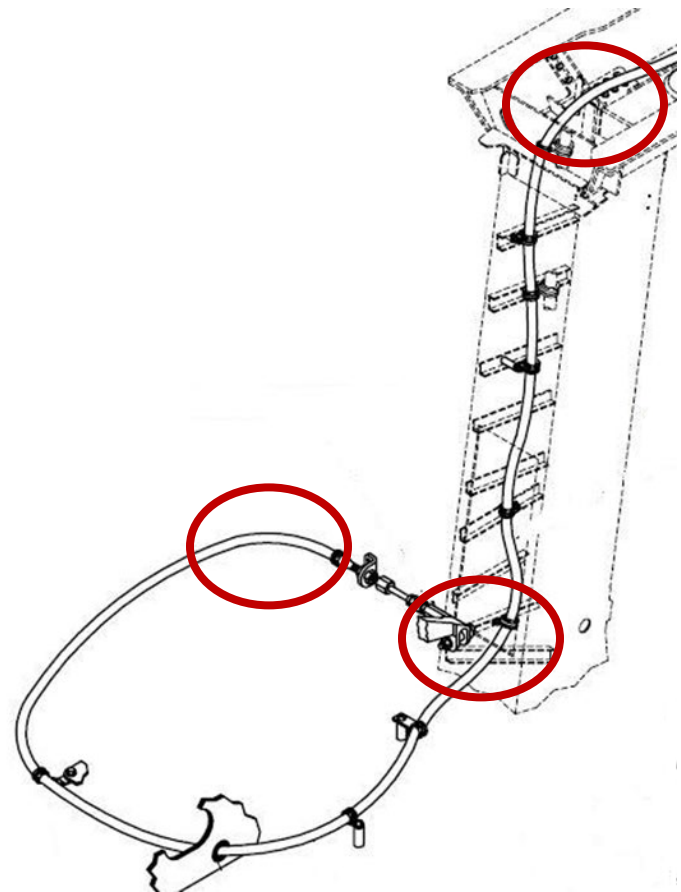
Locations of Reported Throttle Cable Assembly Failures
